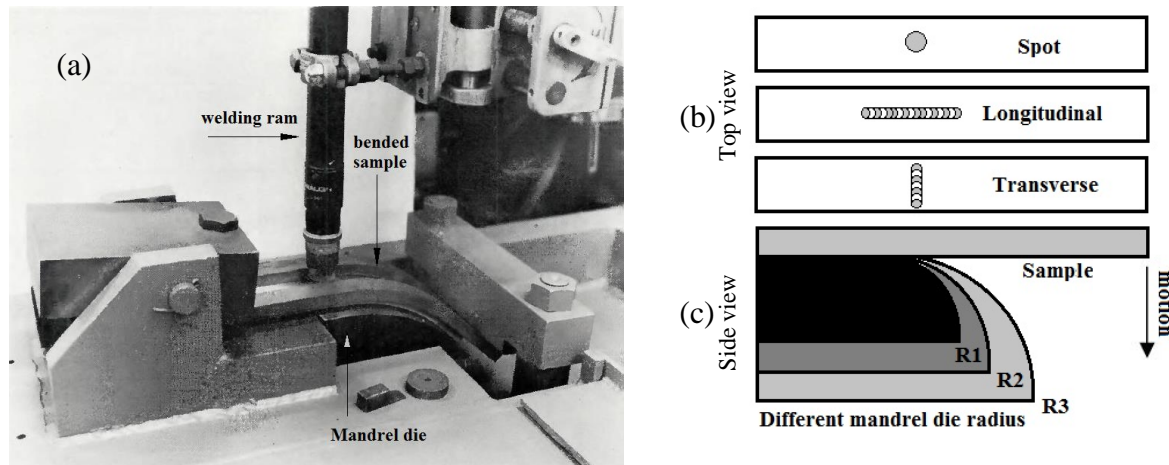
(a) A varestraint testing machine [17]. (b) The direction of welds relative to the applied augmented bending strain. (c) A schematic of the Varestraint testing machine showing its different mandrel die radius (inspired from [18]).
